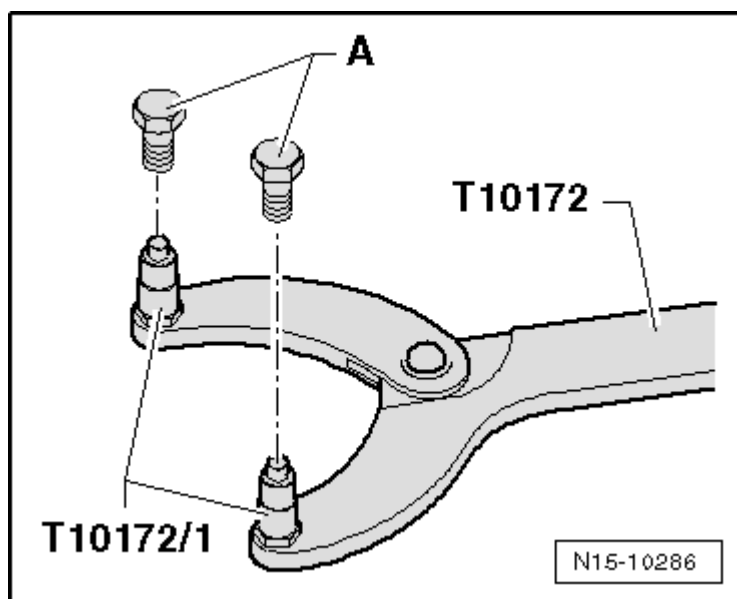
Removing Adapter T10172/1 And Install Bolts
